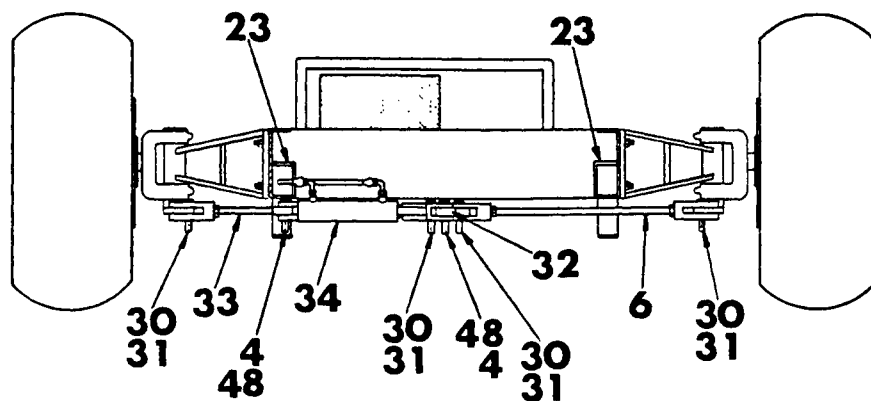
H - STEERING ASSEMBLY (RT26E) (RT26G)
